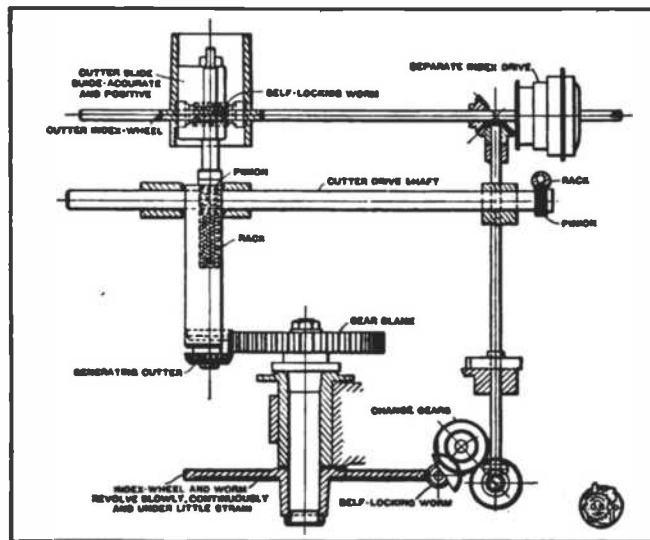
Diagram explaining action of gear shaper indexing mechanism
